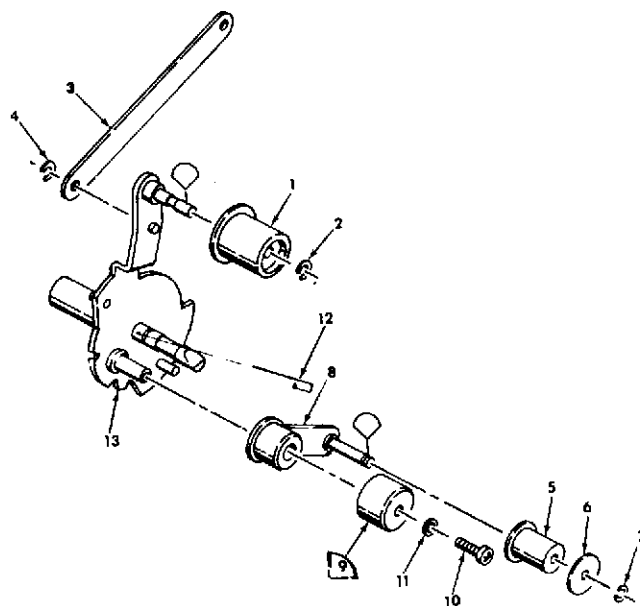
THREADING CONTROL PLATE COMPLETE
